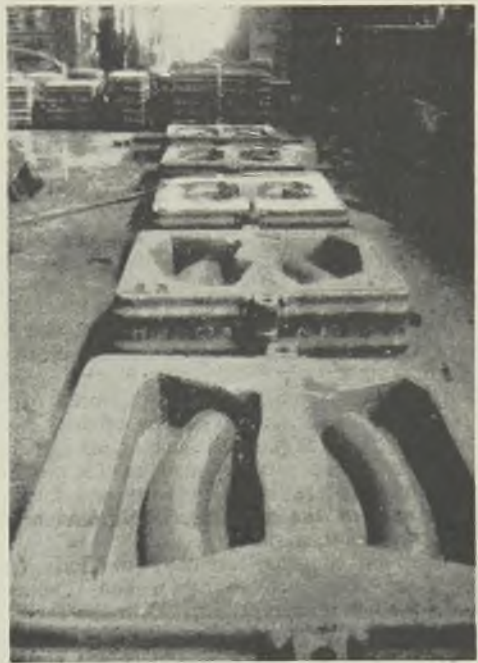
BOTTOM PARTS FOR THE CASTINGS SHOWN IN FIGS. 3 AND 4.
